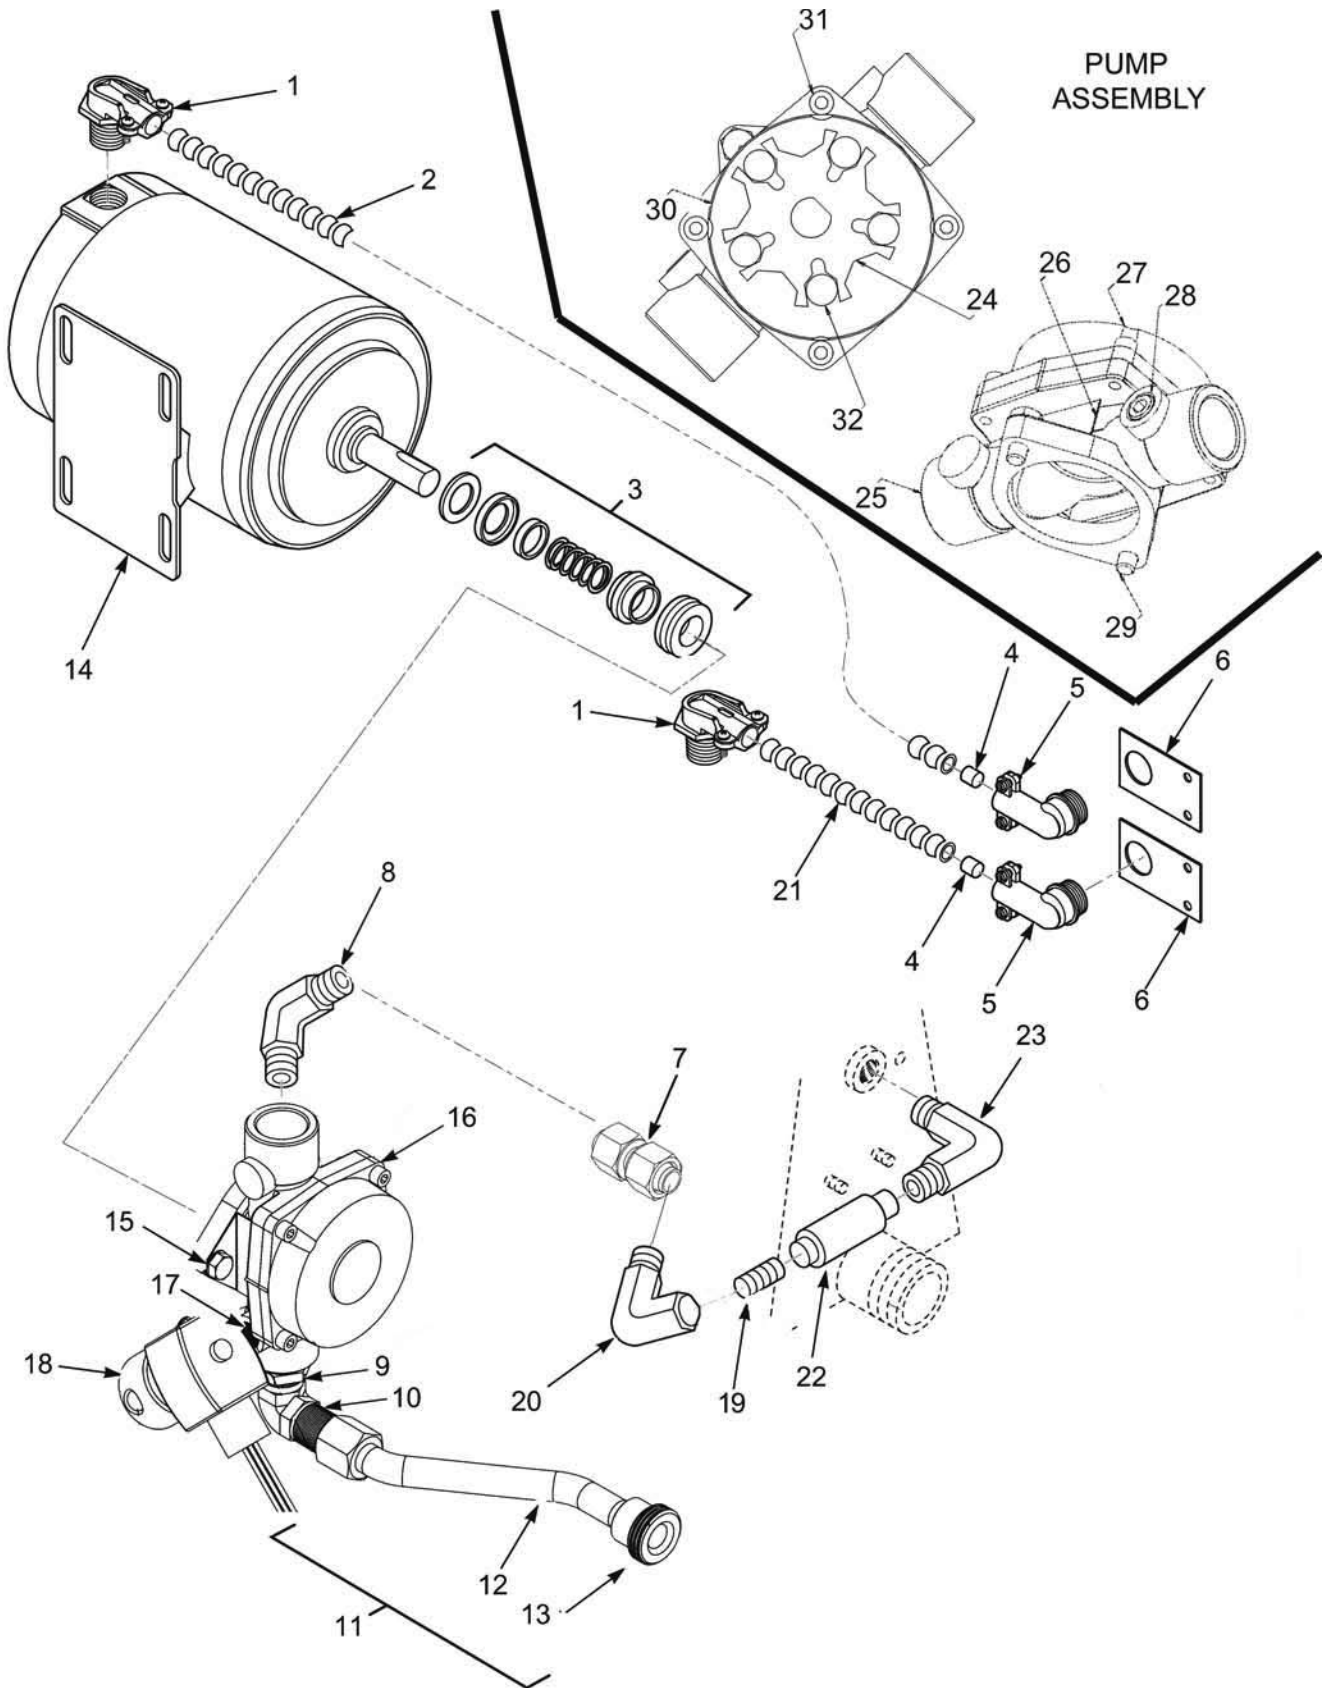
Filter Pump Assembly (SN: LH016JC & Above)
